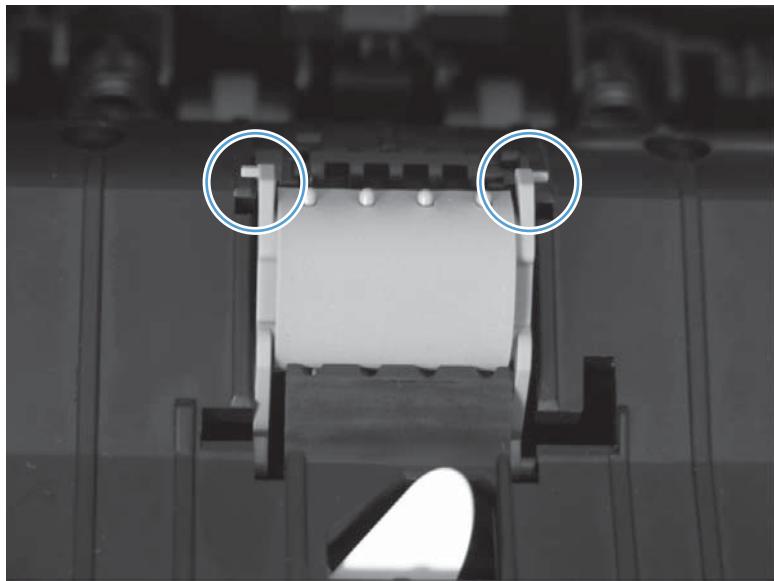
Reinstall the ADF separation pad assembly (3 of 5)
